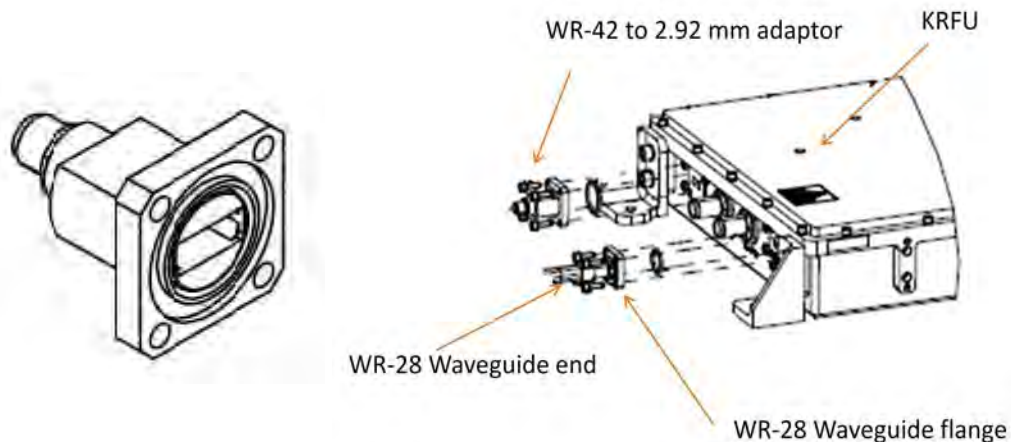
WR42 Waveguide to 2.92 mm Coaxial Connector Adapter
